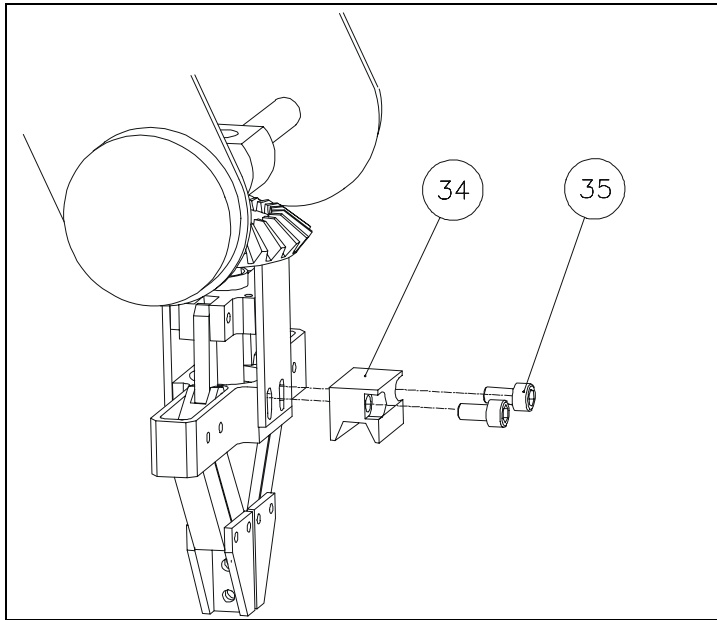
Attaching Welding Gun Adapter to Gripper
